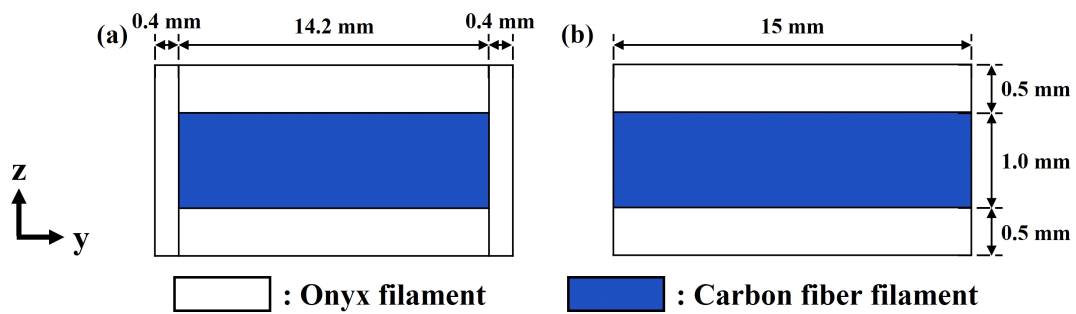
Specimen cross-section: (a) Type 1, (b) Type 2
